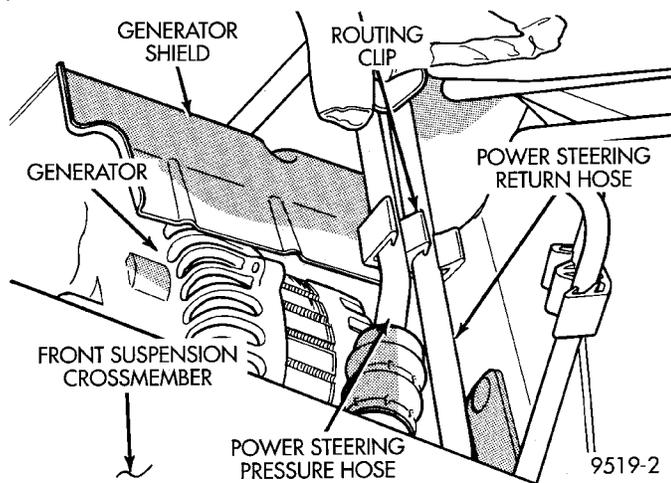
Power Steering Hose Routing Clip At Generator Shield
